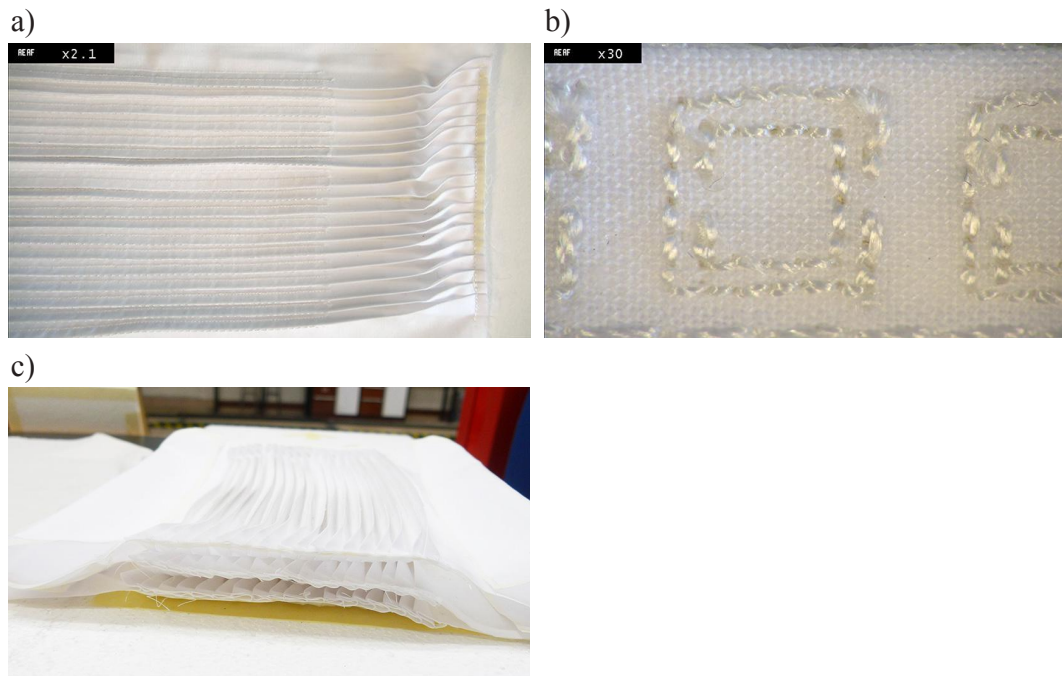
Embroidered samples (a) One layer (b) Detail of non-conductive top thread stitch. (c) Stacked three-layer prototype.
